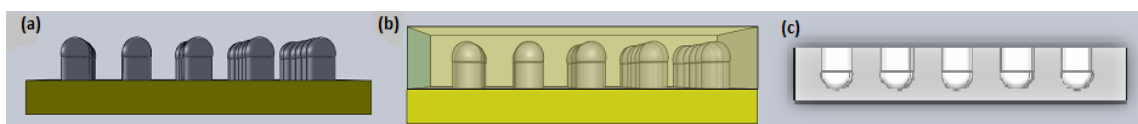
(a) Metal bullet mold, (b) PDMS cross-linked Metal mold, (c) Removed molded PDMS structure of bullet mold
